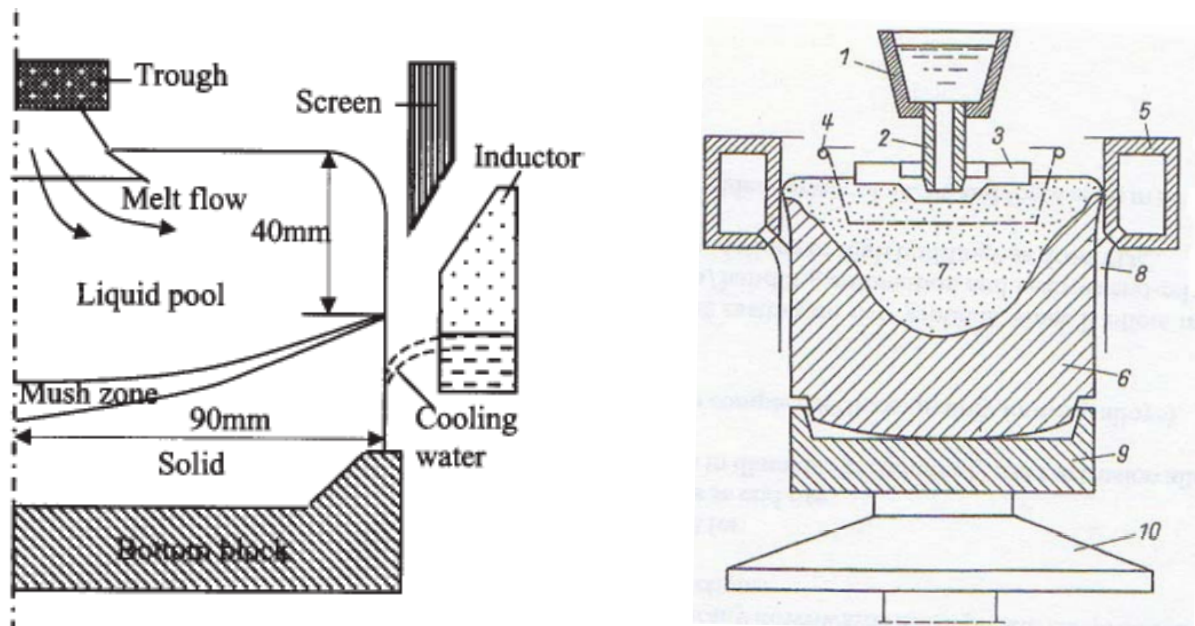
Principle of electromagnetic casting (on the left) and direct chill casting (on the right) [17, 18]
